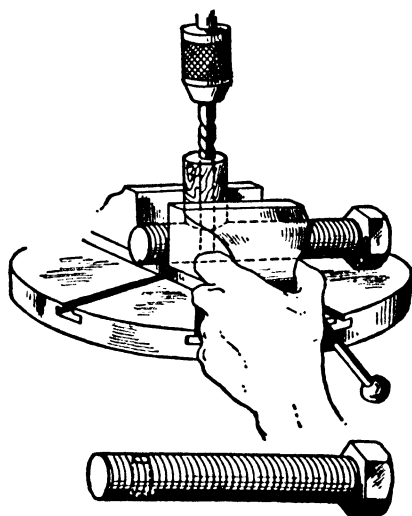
Using a wooden dowel rod as a drill bushing.
